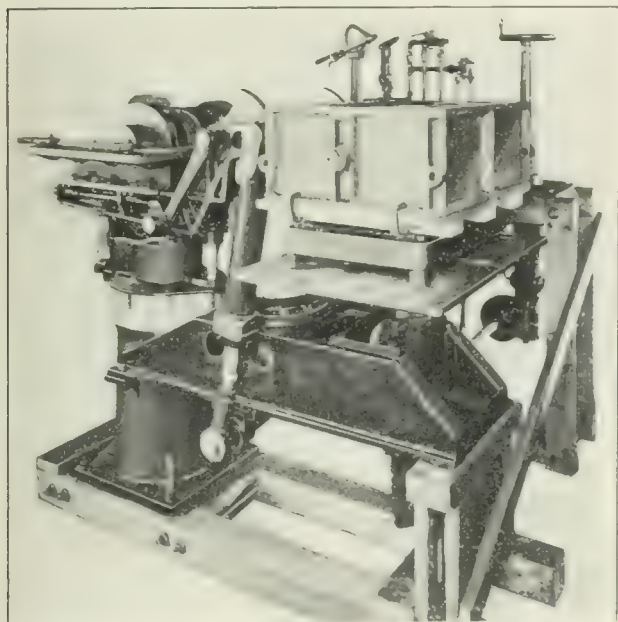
The Machine with the Flask Rolled Over and the Pattern Drawn and Rolled Back
